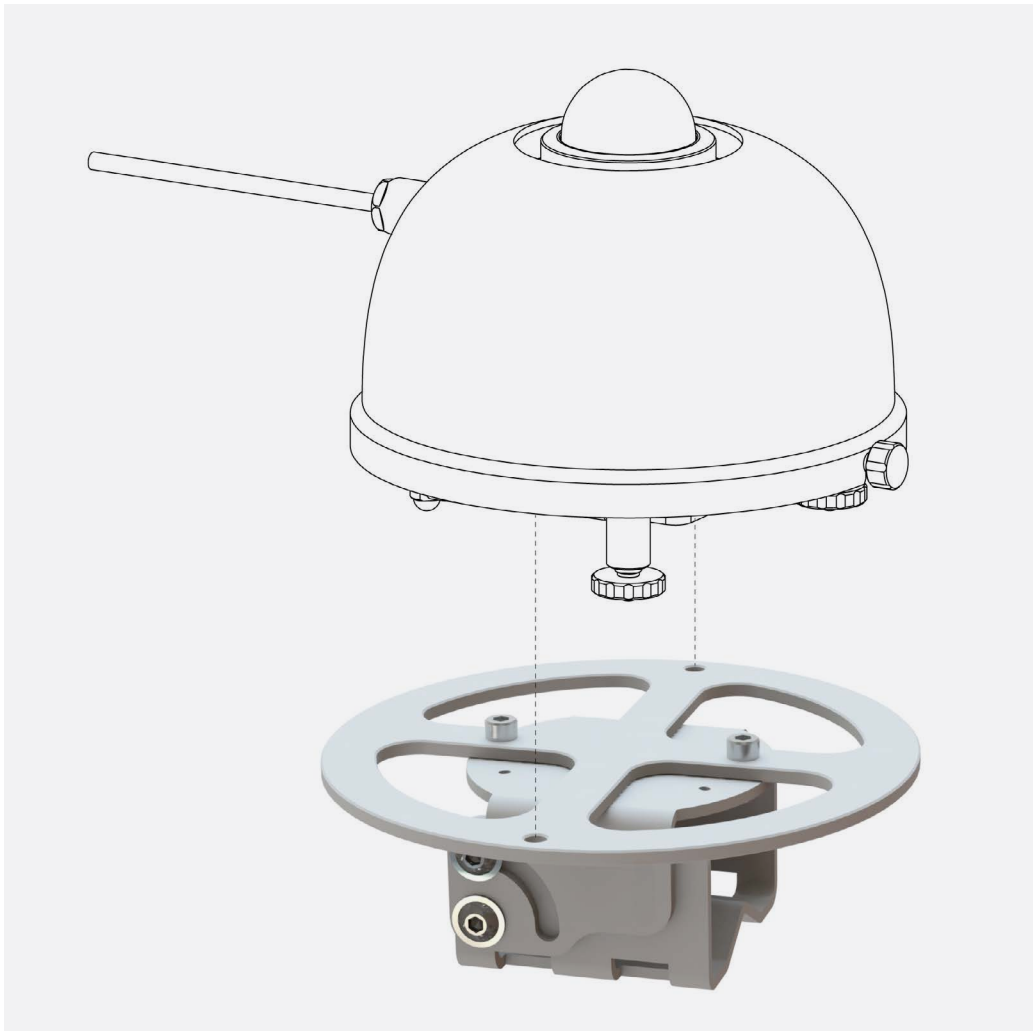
Installation of VU01 on the VMA01 adapter plate using the 2 M5 bolts and nuts included with VU01, step 3.
